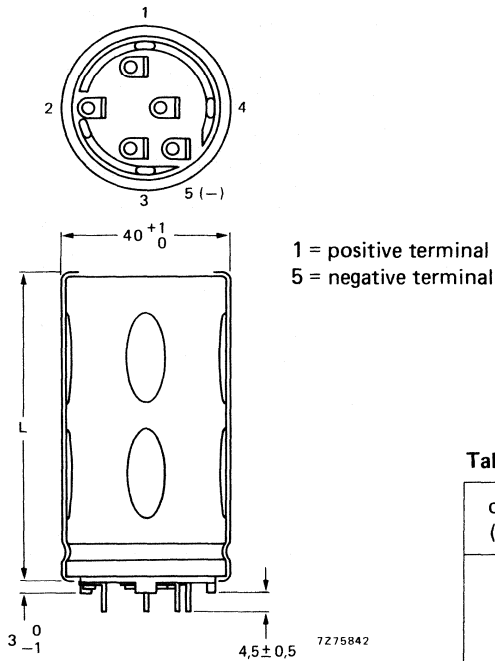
Capacitor with printed wiring pins; see Table 6 for dimension L.
